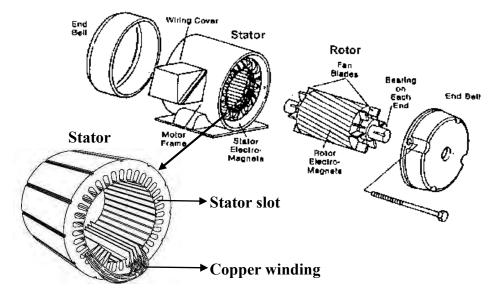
shows the parts of an AC motor. AC motor consists of two main parts, which are stator and rotor. Stator is a fix part of the ac motor that located inside of the motor frame and consists of bundles of laminated copper winding that filled on the stator slots. The purpose of stator are used to create magnetic field for the motor through the process of electromagnetism. While rotor is a hollow laminated core consists of slots on its external periphery that mounted on the shaft of the motor. These slots will be filled with rotor windings. There are two type of rotors which are squirrel cage rotor as shown in Figure 2.2 and wound rotor as shown in Figure 2.3, and are explained as the followings:
